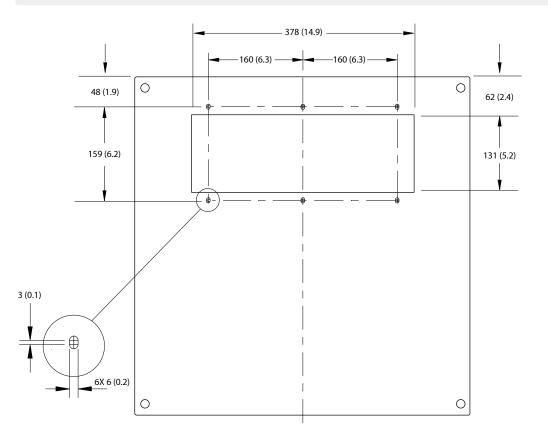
Dimensions of Opening in Top Plate of TS8 Cabinet
